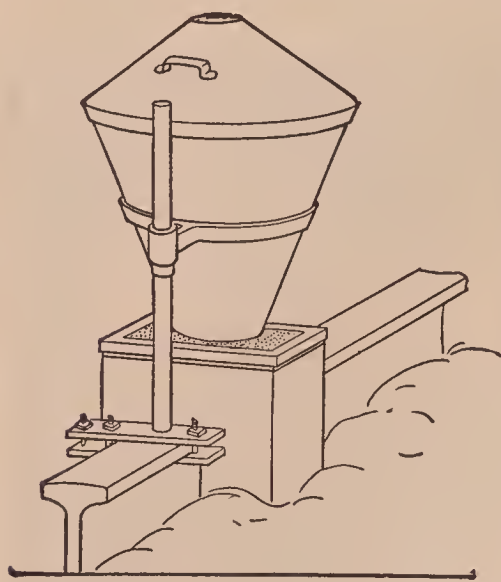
Sketch of a crucible and mold in position for welding a steel rail with thermit.
